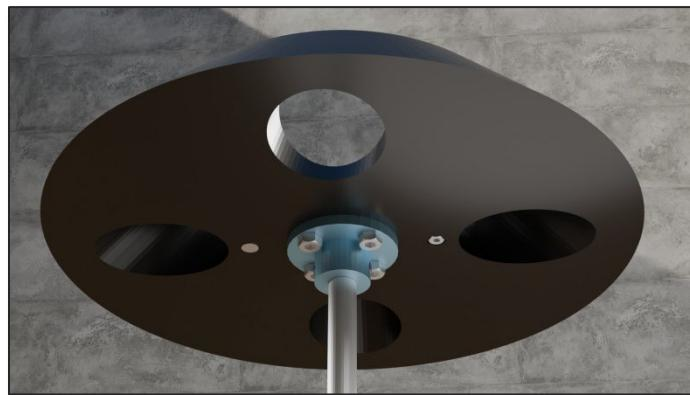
Sliding on the test tube holder onto the shaft so that is just above the hall sensor.
